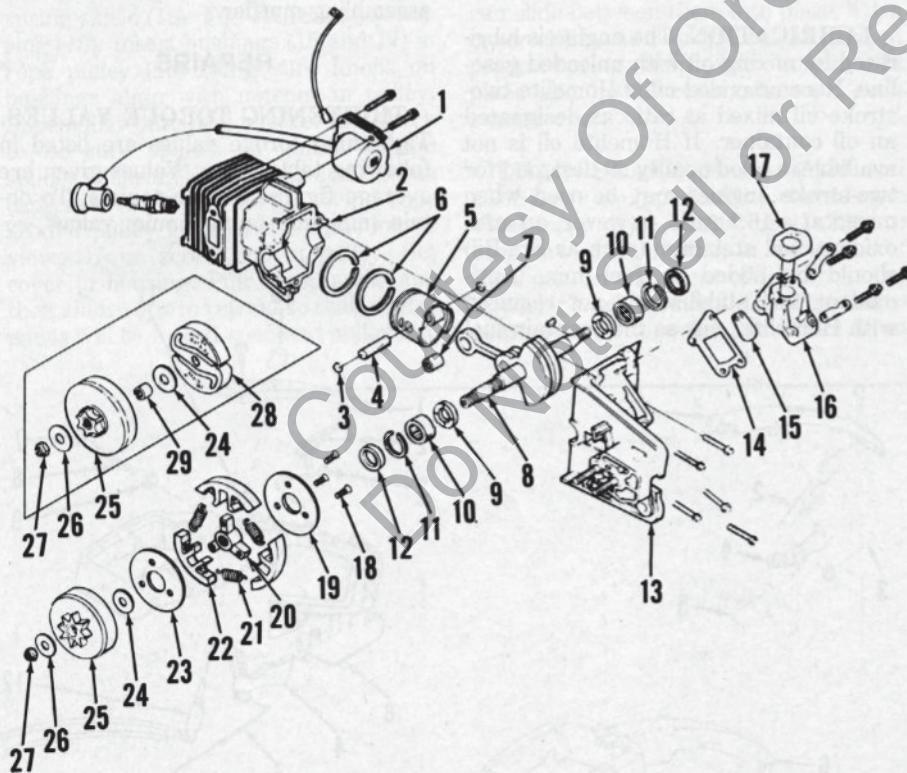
Exploded view of engine and clutch assemblies. Models 245HG and 245SL are equipped with three-shoe clutch. Models 240HG and 240SL are equipped with "S" clutch (inset).
